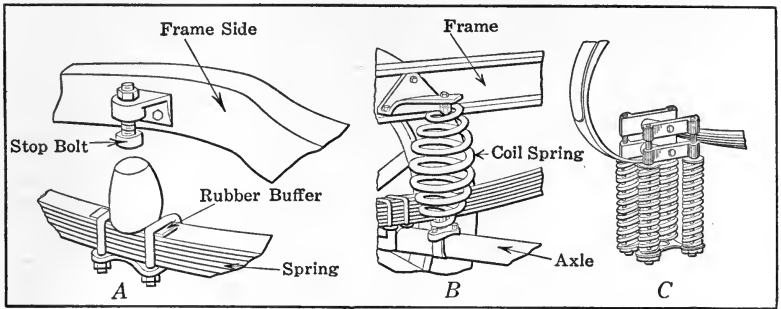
Methods of Promoting Easy Riding of Automobiles Supplied with Inadequate Springs.
